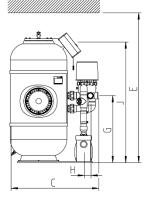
Dimensional drawing of filter system GENO-mat F 500 A
